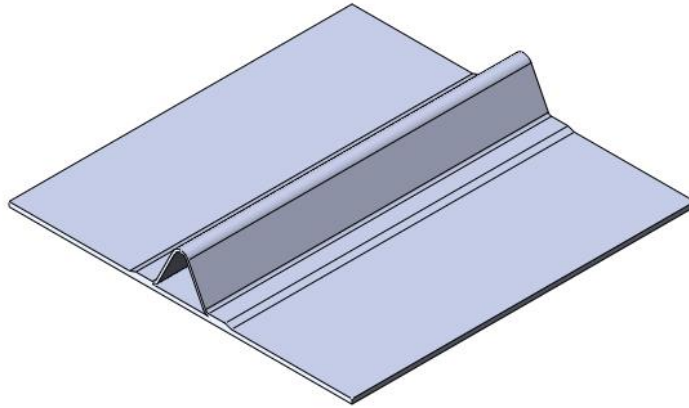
CAD model of the delta-stringer demonstrator panel
